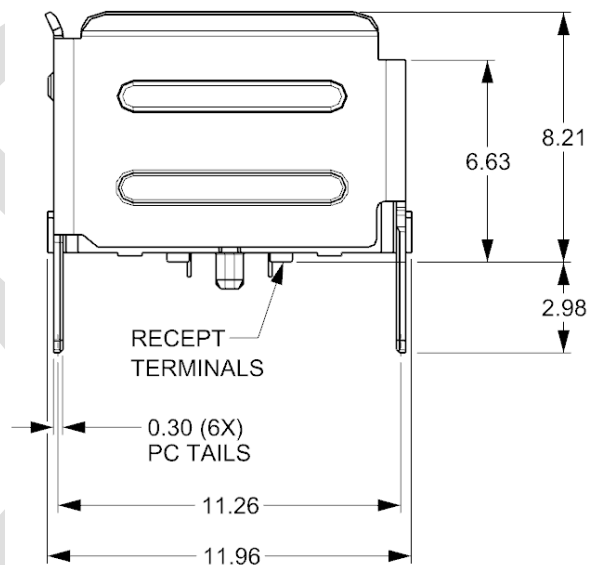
124-Pin Profile View of Fixed-Side Connector Cage
